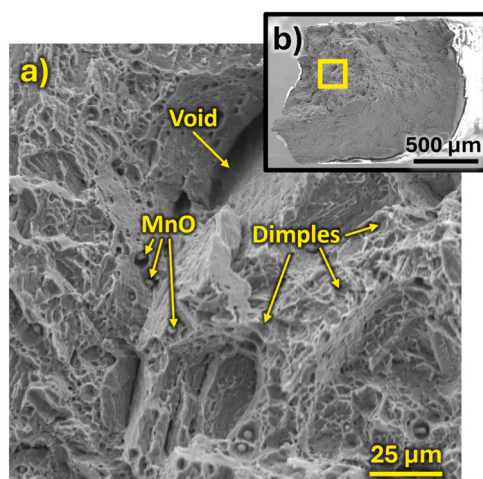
Fracture surface of the gas tungsten arc welded dissimilar joint.
